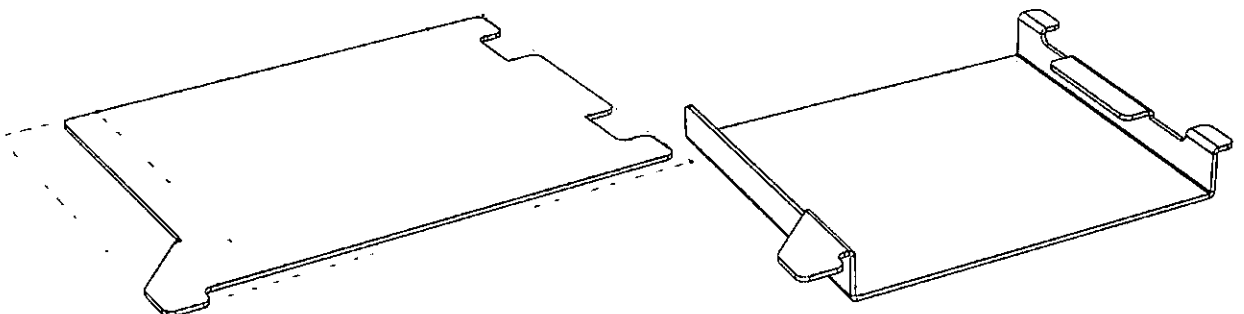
SolidWorks 2012 allows unfolding of solid parts into sheet metal features. Shown is the M3A2 optical drive bracket. Curt Adkins.
